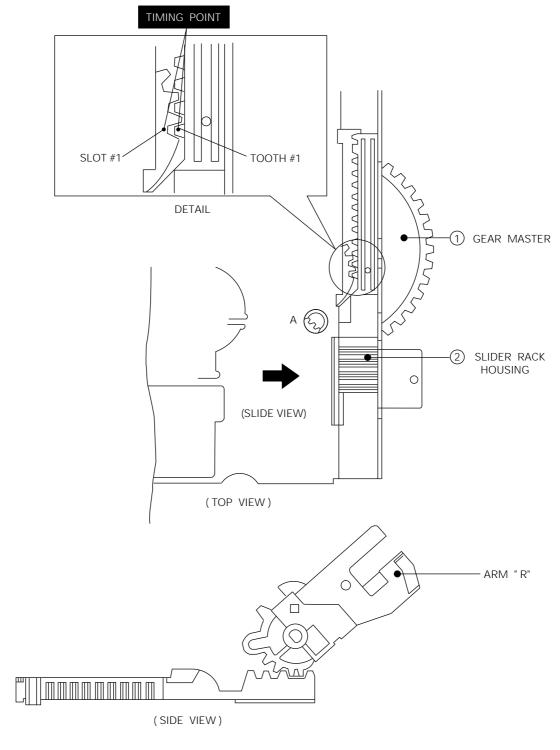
Assembly of Slide Rack Housing and Gear Master
